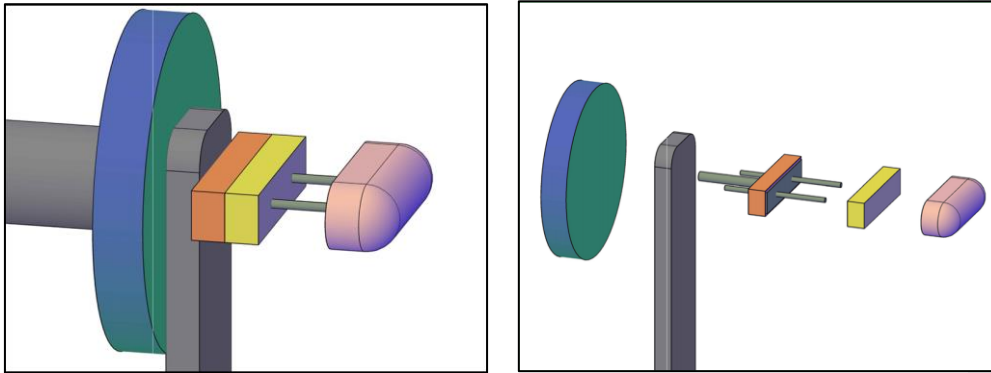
Locking Mechanism CAD by Chase Richardson
